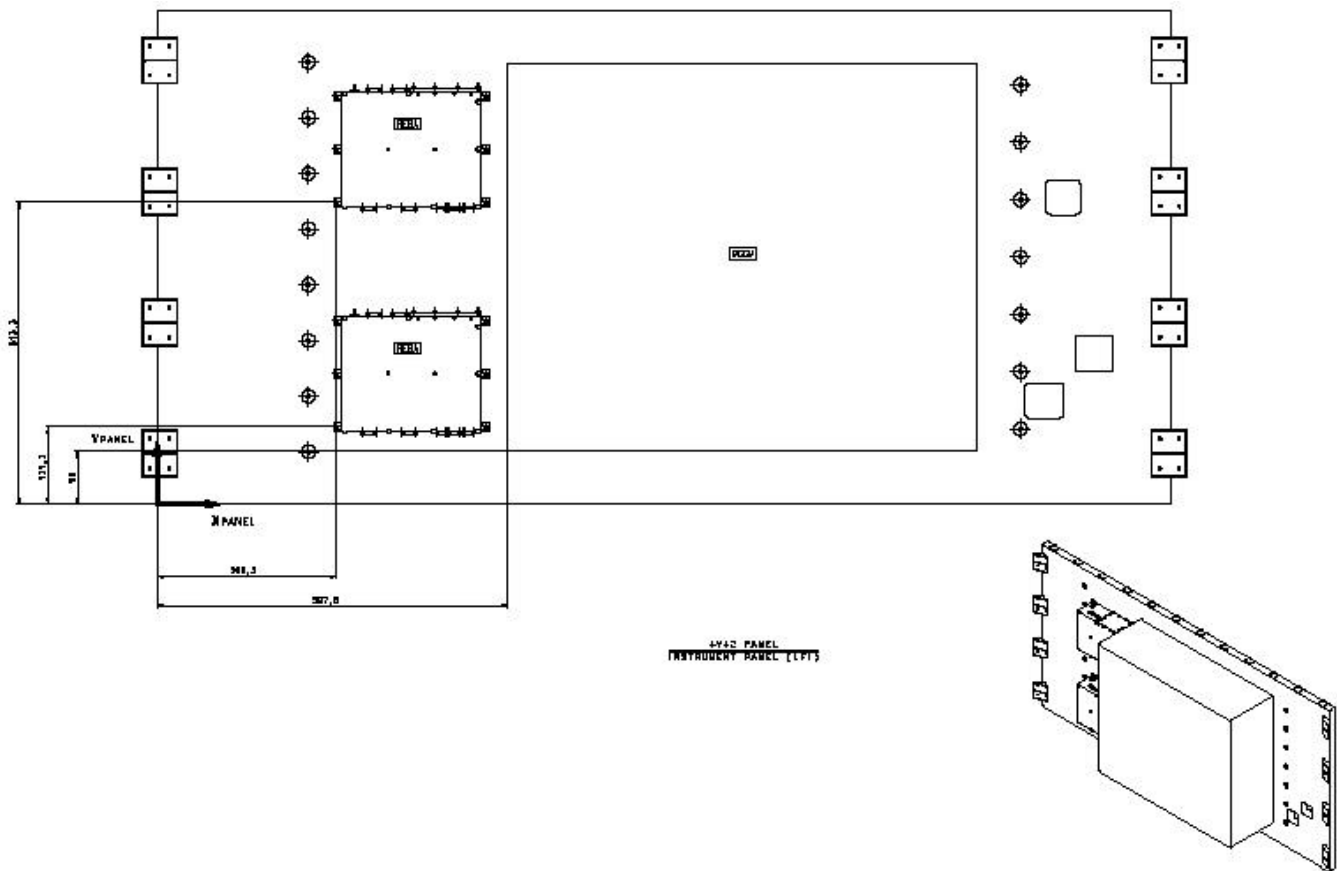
0.1K PANEL LAYOUT
